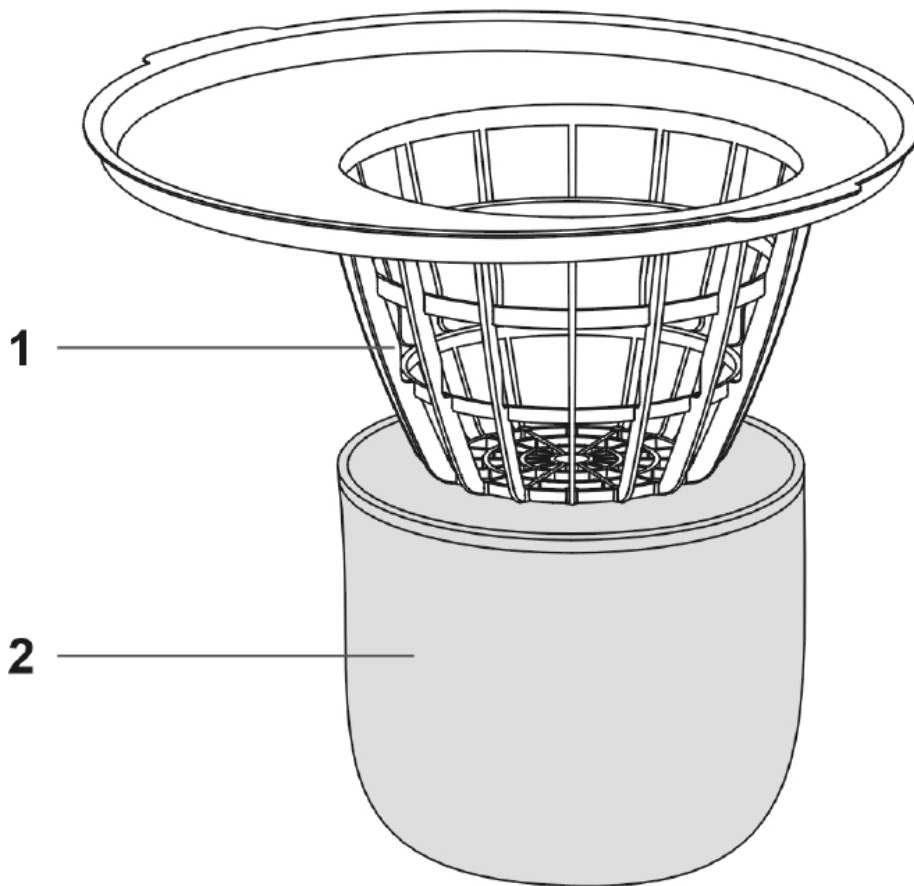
Spare parts drawing 2, main filter, flexCAT 116 Q
